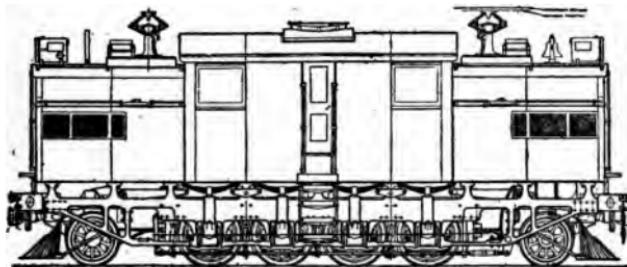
200,000-lb. electric locomotive (dimensions, see Fig. 7).
